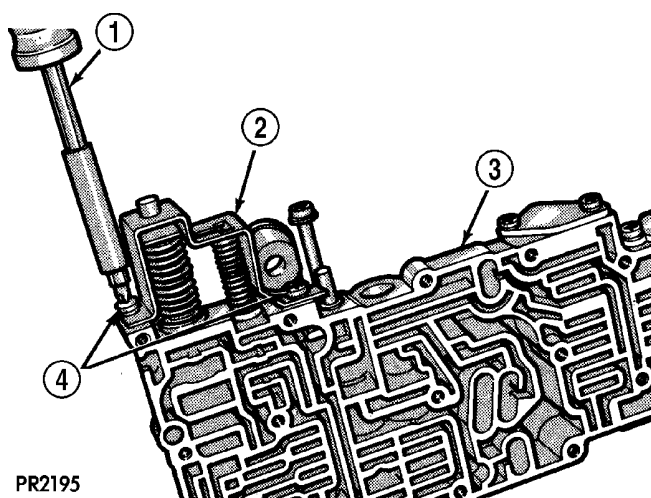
Pressure Regulator and Adjusting Screw Bracket
